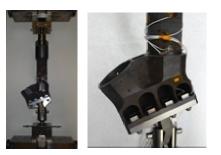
beam end fitting junction tensile test and view of the screwed end fitting on the I/F plate
